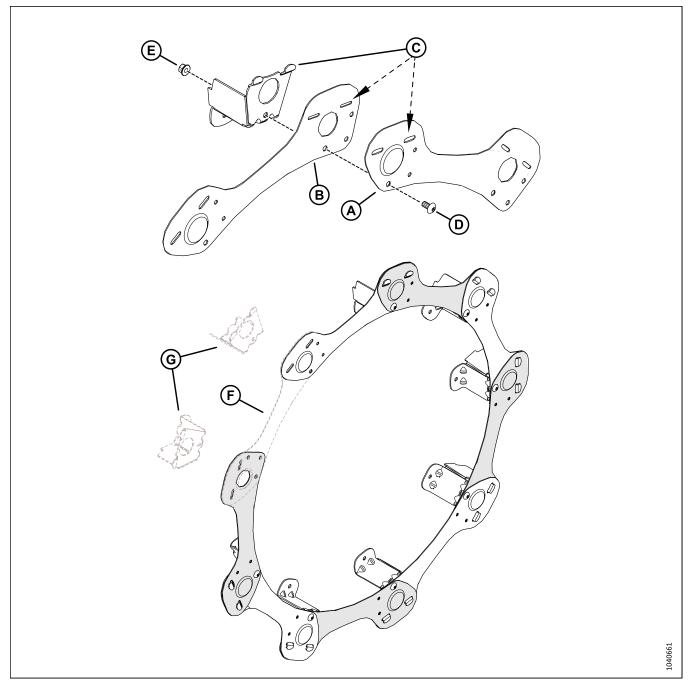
Nine-Bat Reel – Initial Endshield Assembly
